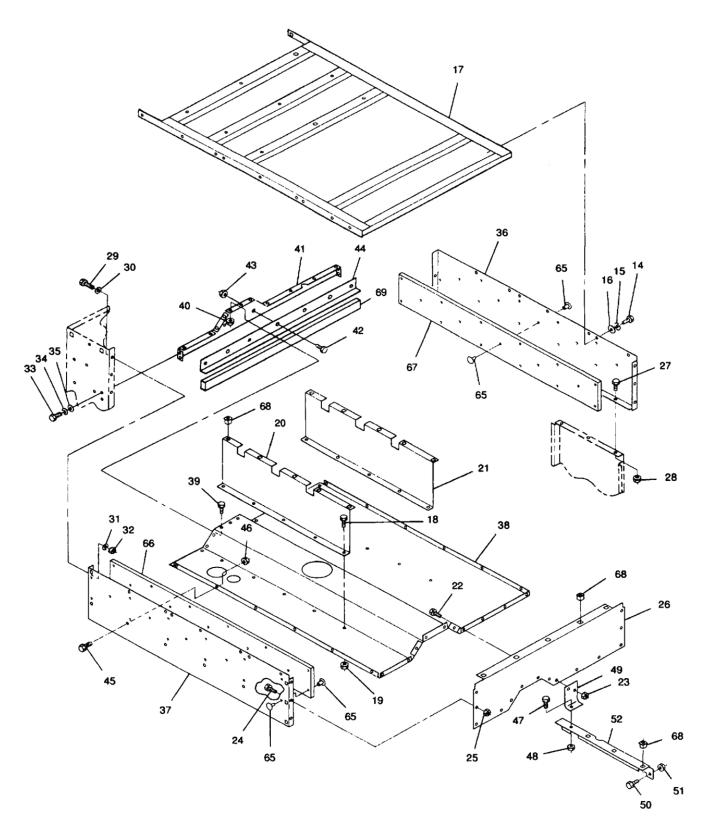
Generator Set Top Housing Section (Sheet 2 of 2).
